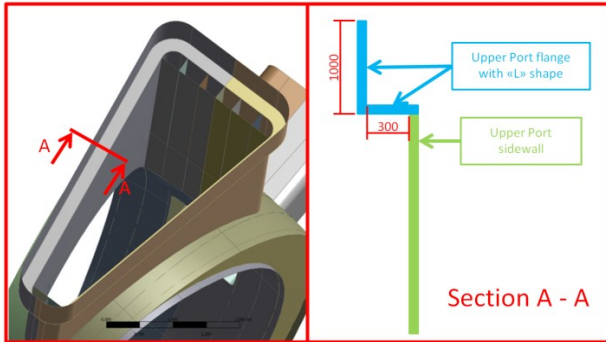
Upper port flange with "L" shape, dimensions are in "mm"
